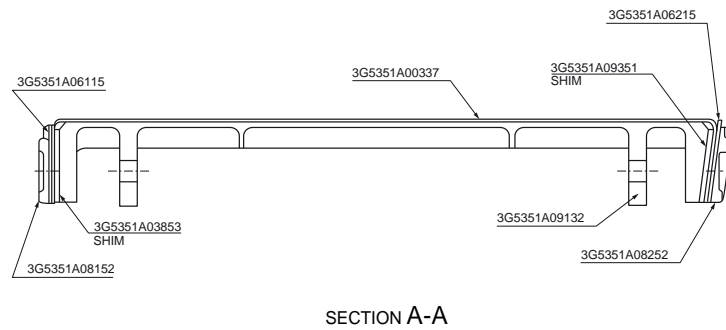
(Sheet 1 of 6) Tail plane lower fitting - Replacement (remove and install a new item)
